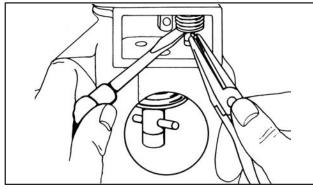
REMOVING VALVES AND REPLACING VALVES
